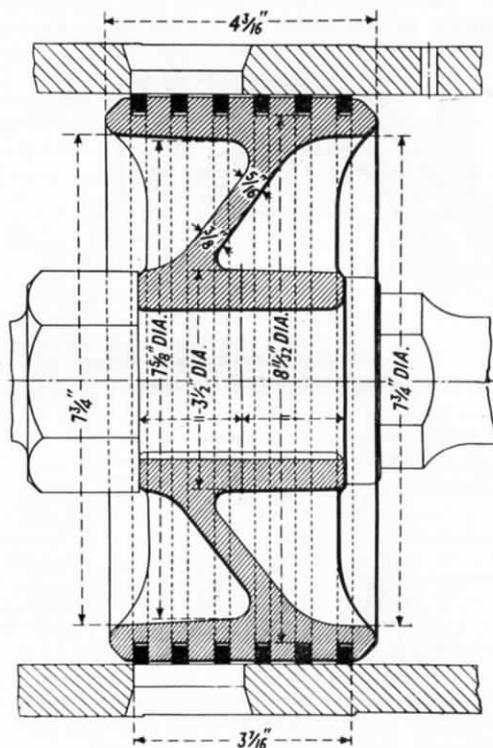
LATEST TYPE OF PISTON VALVE, L.M.S.R.
